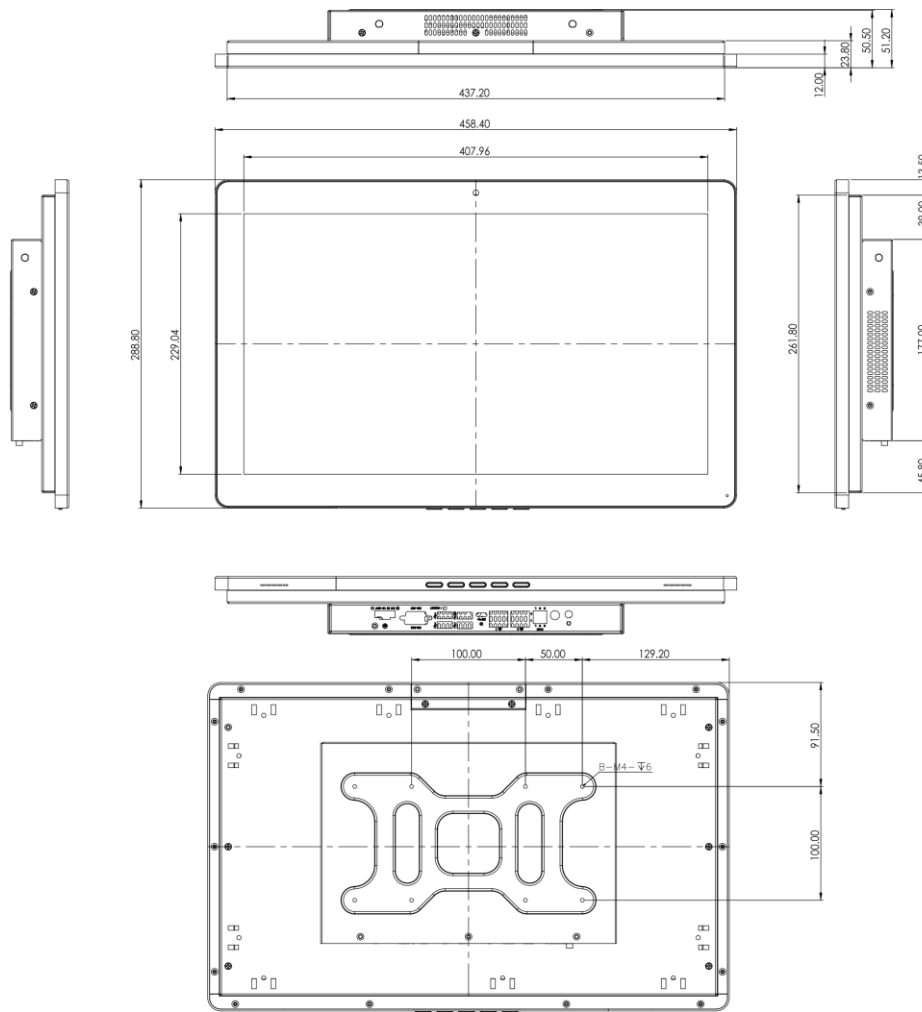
AURA-W185-RK3576 Dimensions (mm)
